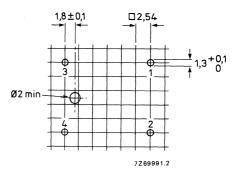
Hole pattern for mounting on a printedwiring board (component side).
